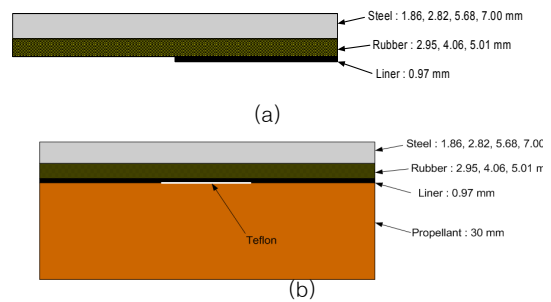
Sectional view of test block (a) steel/rubber adhesive test block (b) liner/propellant disbond test block
